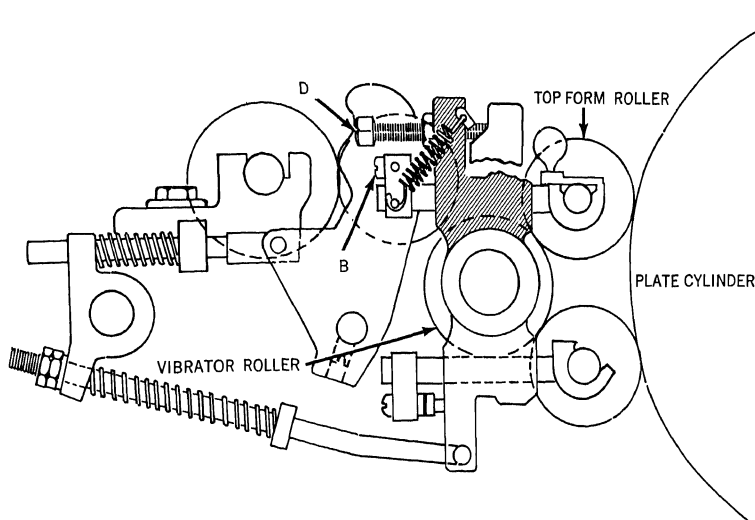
Setting and adjusting top form roller (dampening assembly).
